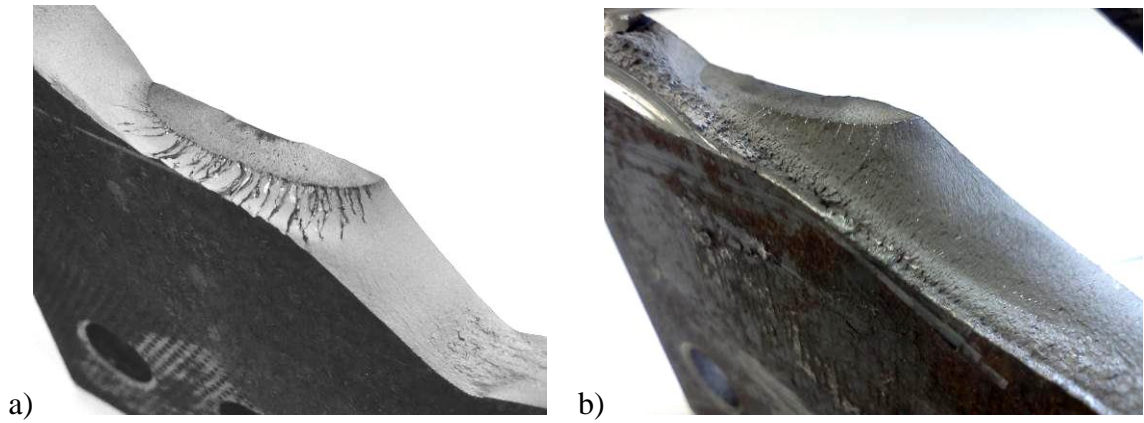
Mixed mode fracture surfaces (a – uniaxial tension, b – three point bend)
